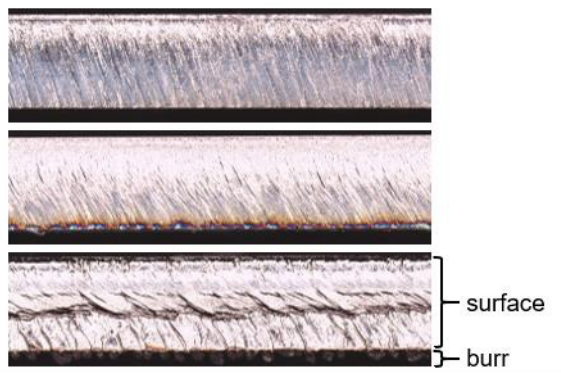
Exemplary laser cut edges in a 3 mm thick stainless steel sheet metal.
